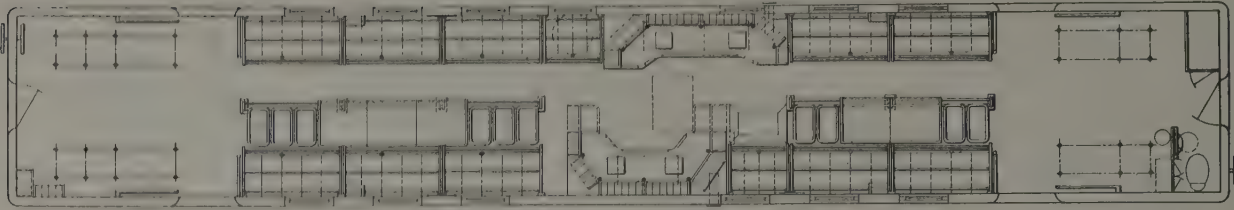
Floor Plan of 60-ft. Postal Car.
